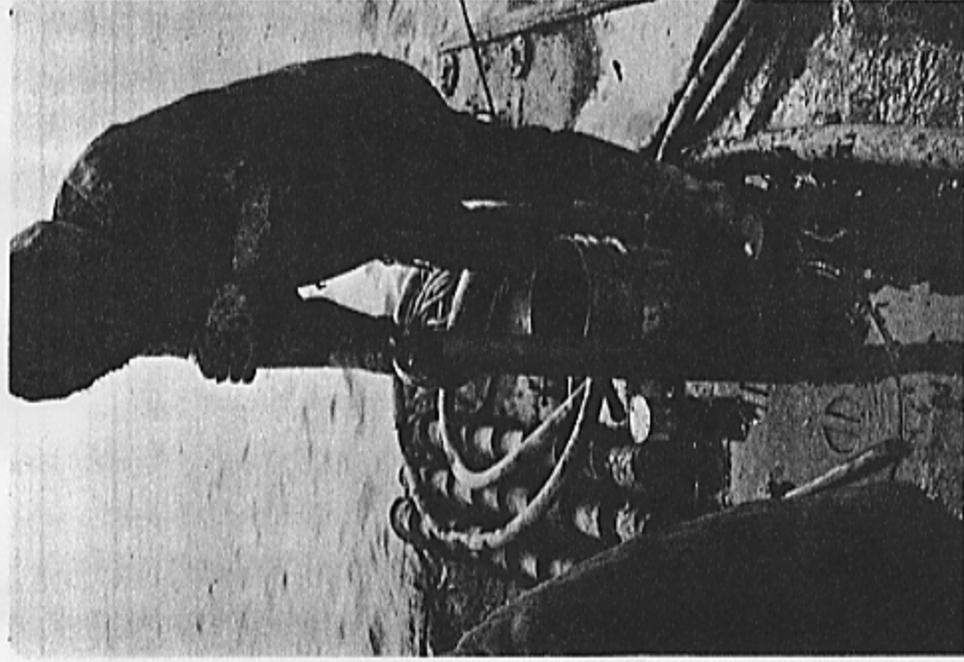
CLEANING AND ASSEMBLING PISTON HEAD
